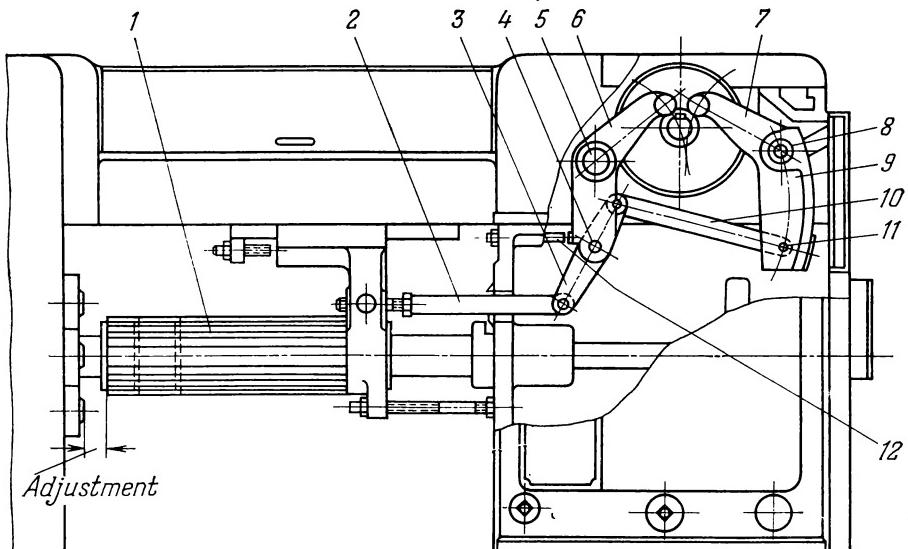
Drive of the end tool slide in the model 1A225-6 automatic
